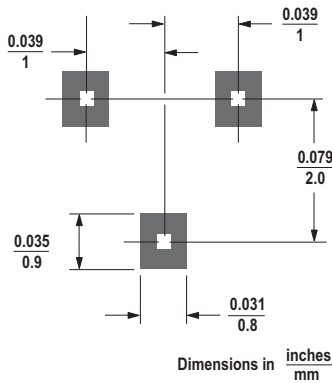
Recommended PCB Pad Layout for Avago's SOT-23 Products.
